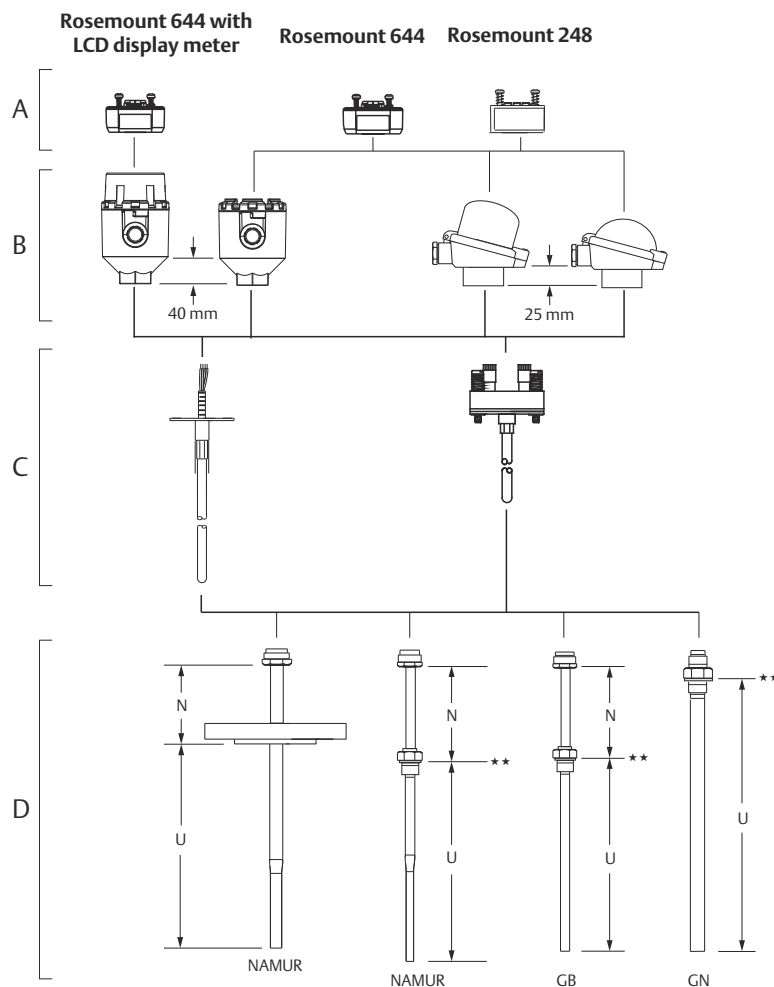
Series 65 RTD and Series 185 Thermocouple Dimensional Drawings
